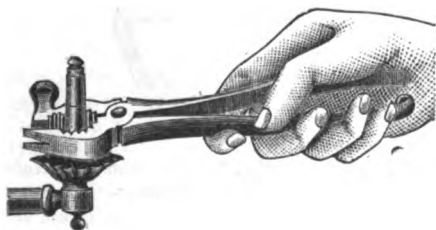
Combination Tool as a Gas Burner and Pipe Wrench.
